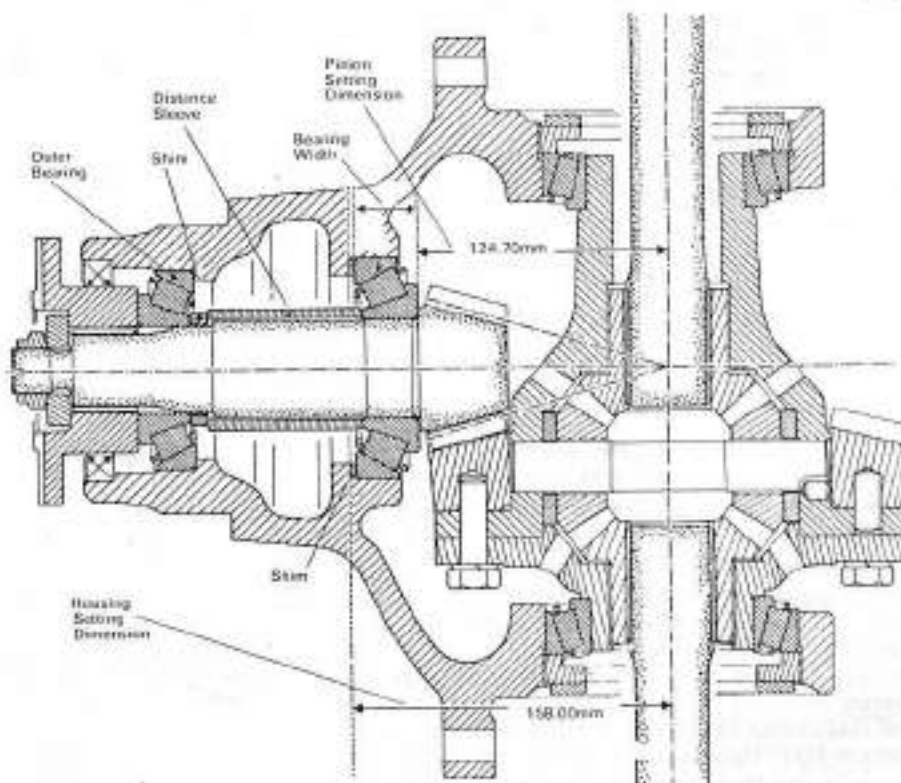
Cross-sectional view of the differential assembly. Note the housing and pinion shaft setting dimensions. Refer to text for procedure to determine shim thickness.
